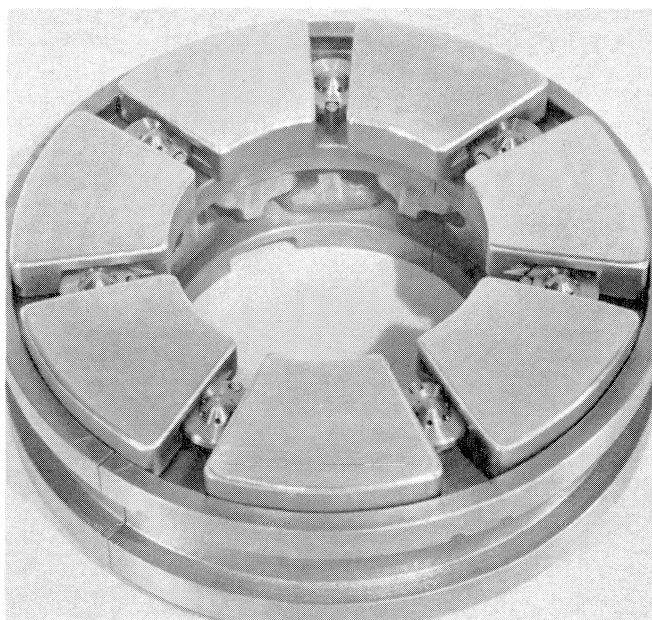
Test Bearing 7125 CQ as Fitted to the Test Machine.
